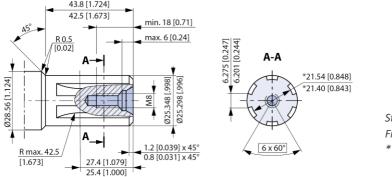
OMP shaft version: Splined shaft B.S. 2059 (SAE 6B)
